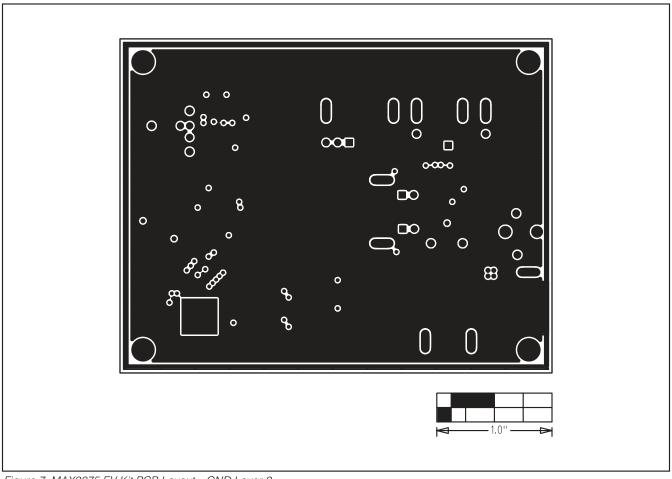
MAX9875 EV Kit PCB Layout—GND Layer 2
